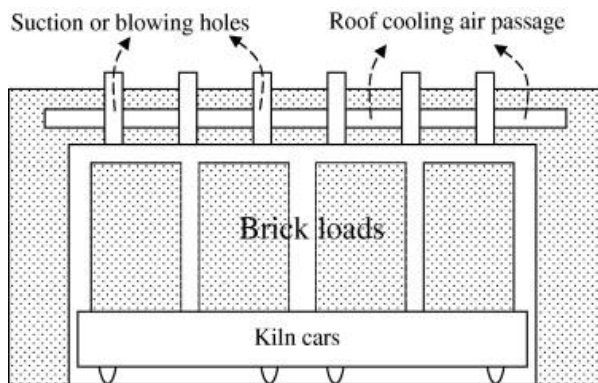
Cross section view of the tunnel kiln with brick loads and kiln car
